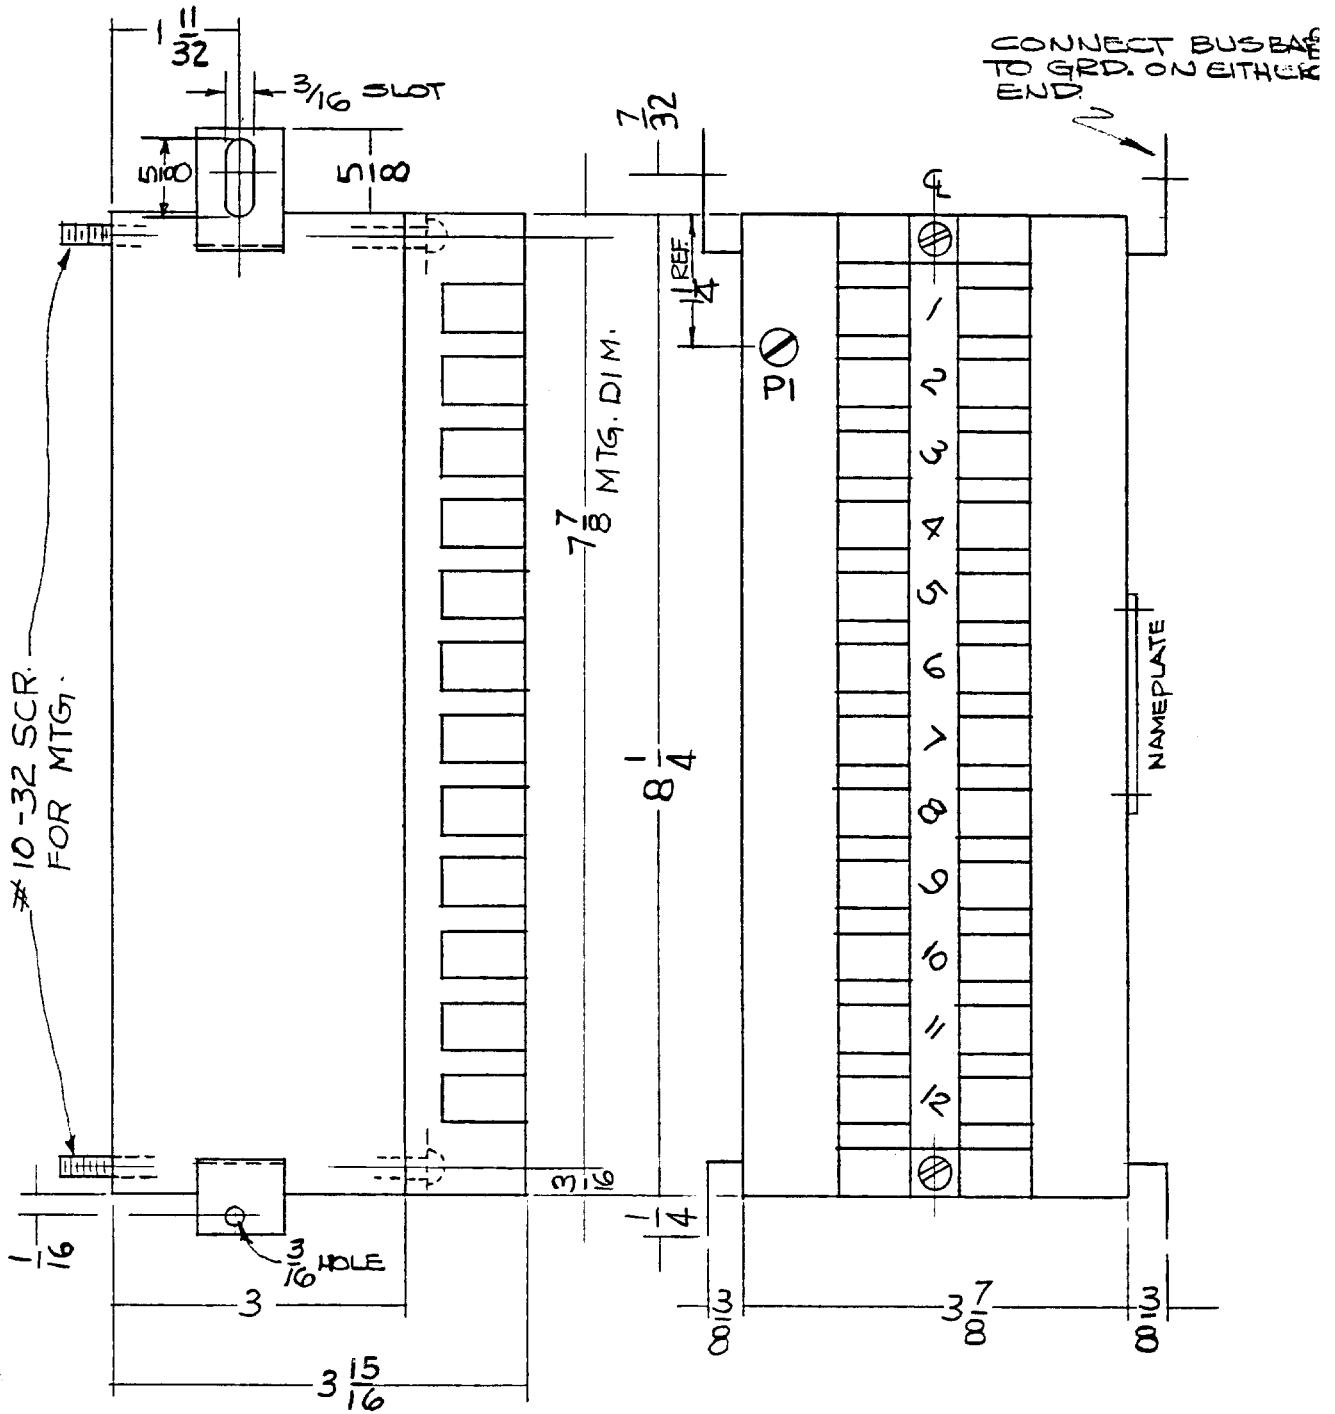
(0227A2137-1) Outline and Mounting Dimensions for the Type SDA50A Battery Clamp
